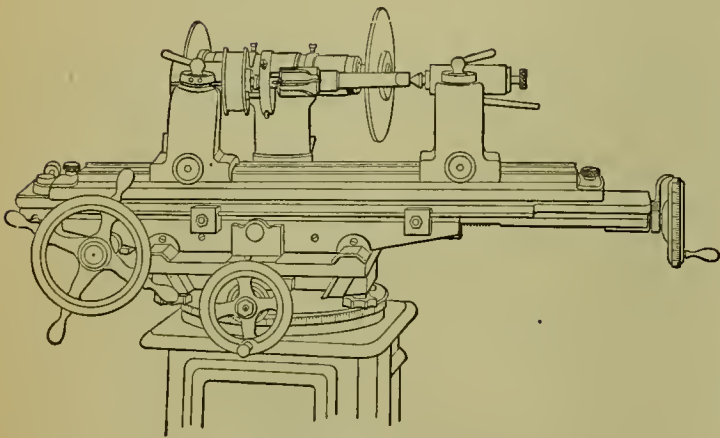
SIZING TAPER SHANK OF CUTTER.
